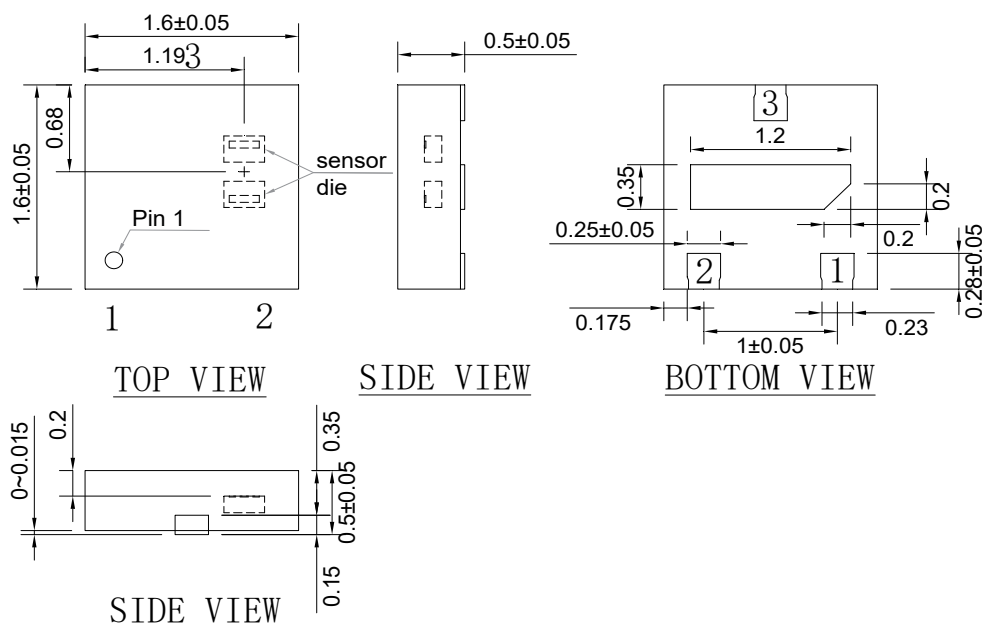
the dimensions of the packaged chips, and the position of sensing area(unit: mm).
